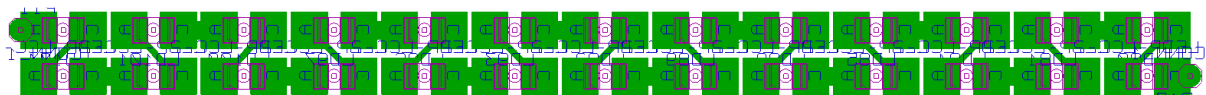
Bottom view PFC LED tube board (partial view, total amount of LEDs: 104- 120)
